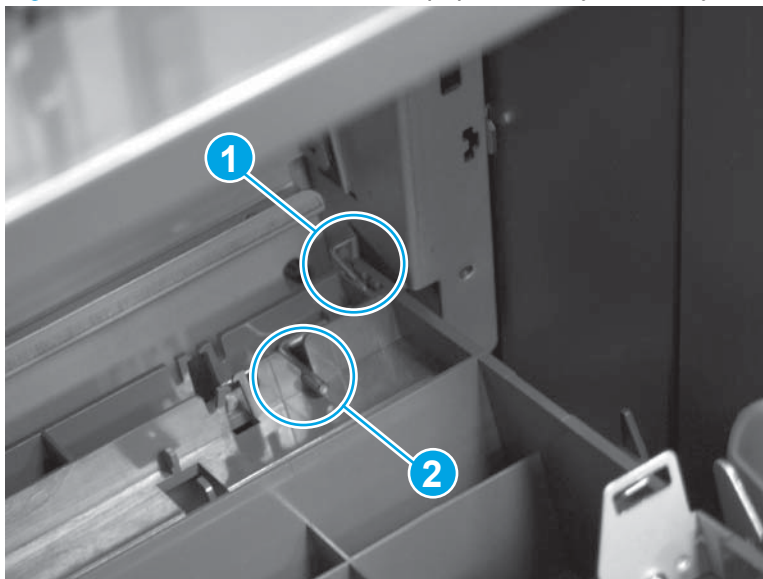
Remove the saddle paper delivery assembly (5 of 5)
